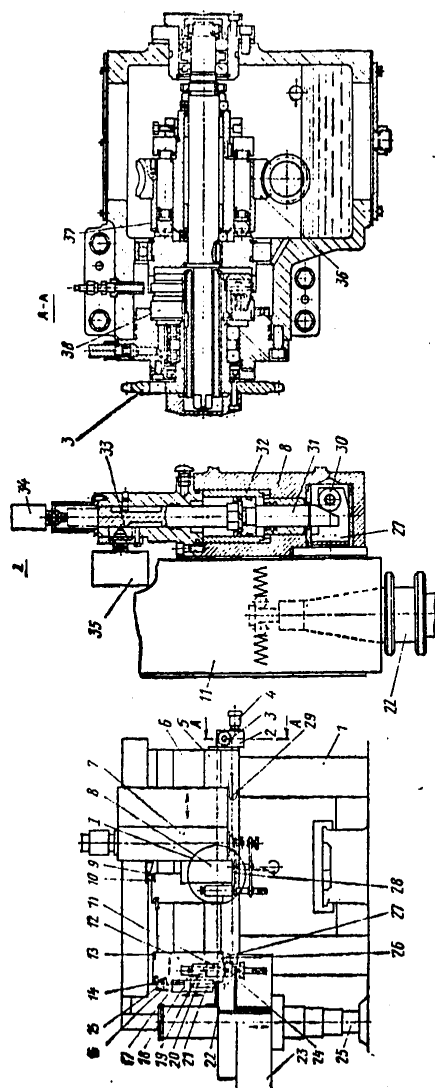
Automatic tool replacement system, installed on model 6620MF4 machine with ChPU.
